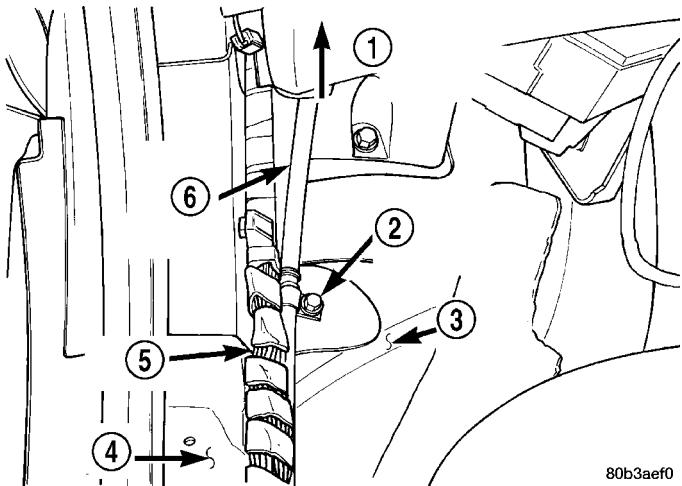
Front Park Brake Cable Attachment At Front Floor Pan
